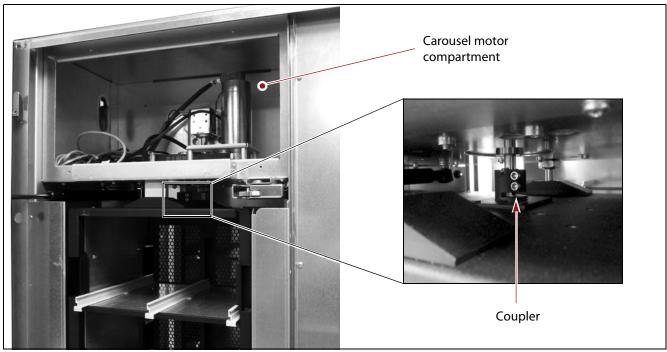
Position the motor assembly so the drive shaft engages the coupler.
